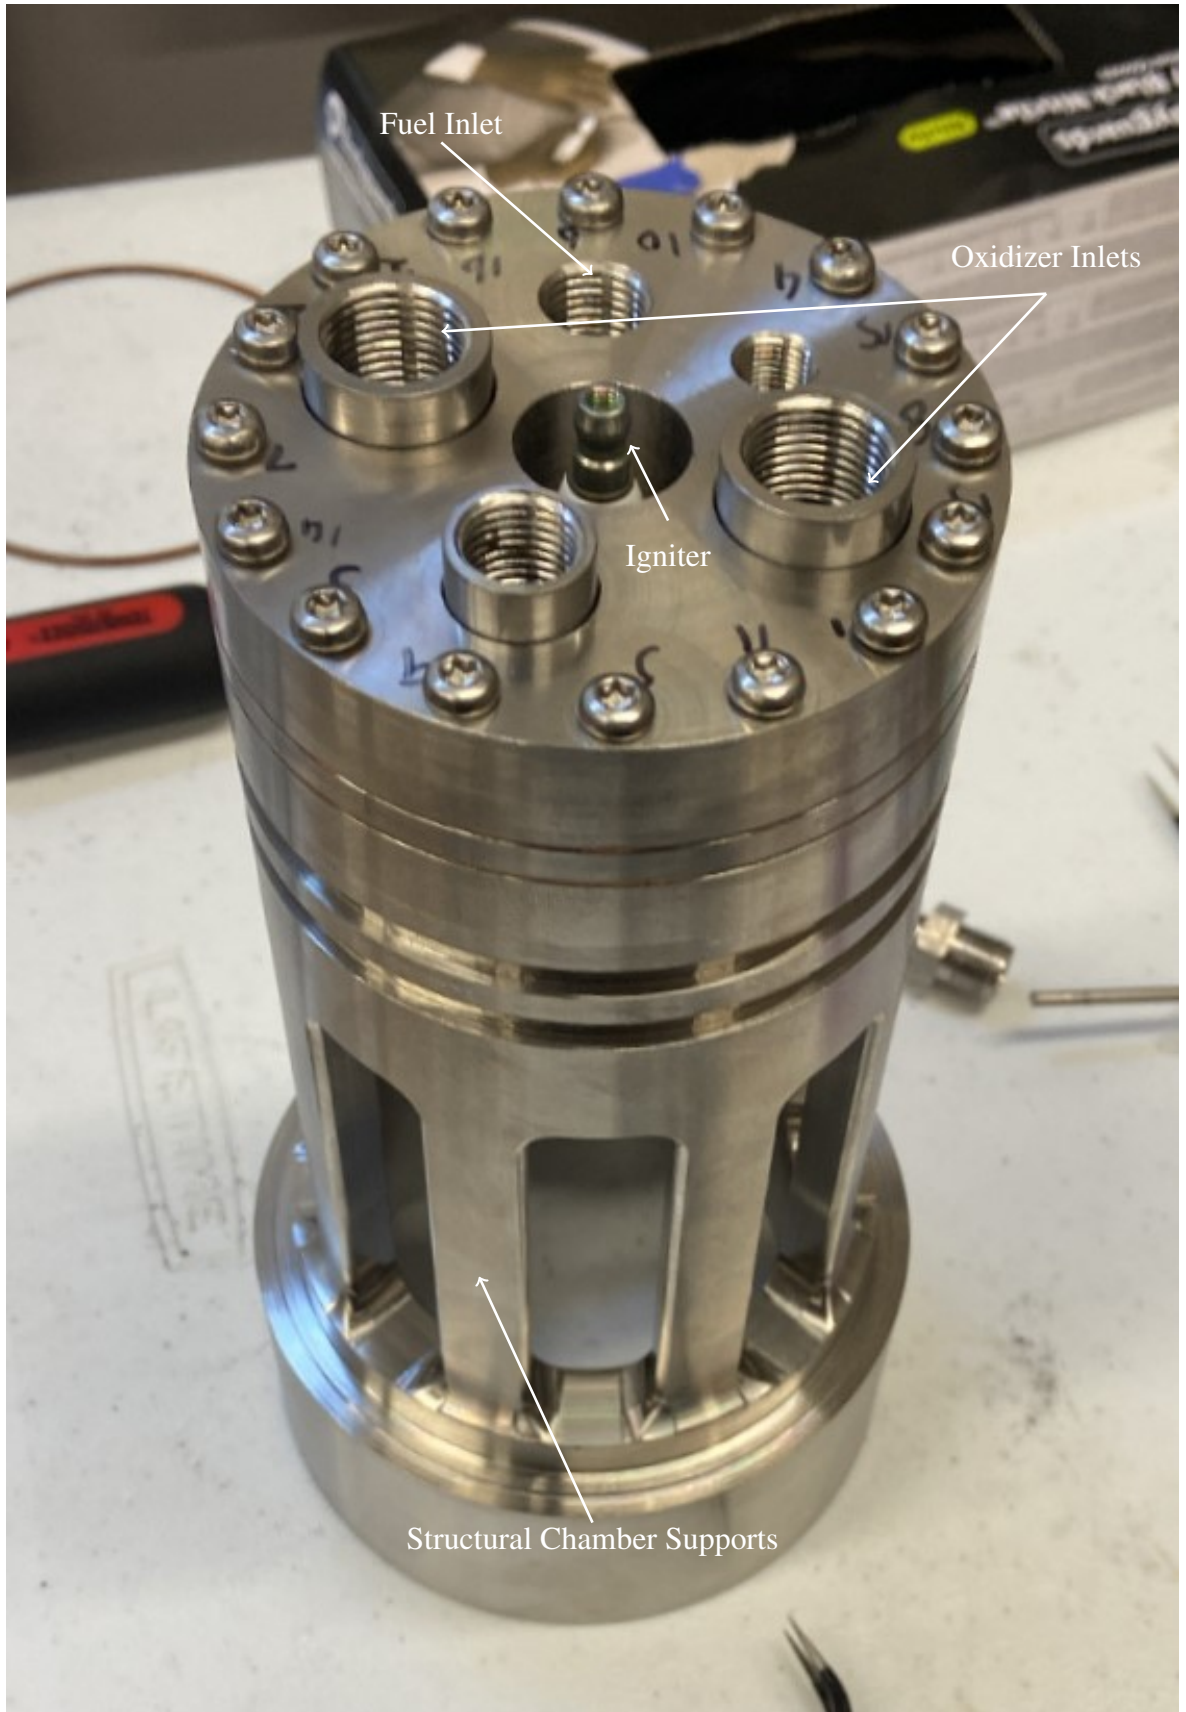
Ouroboros-2 integrated injector and inner combustion chamber.
